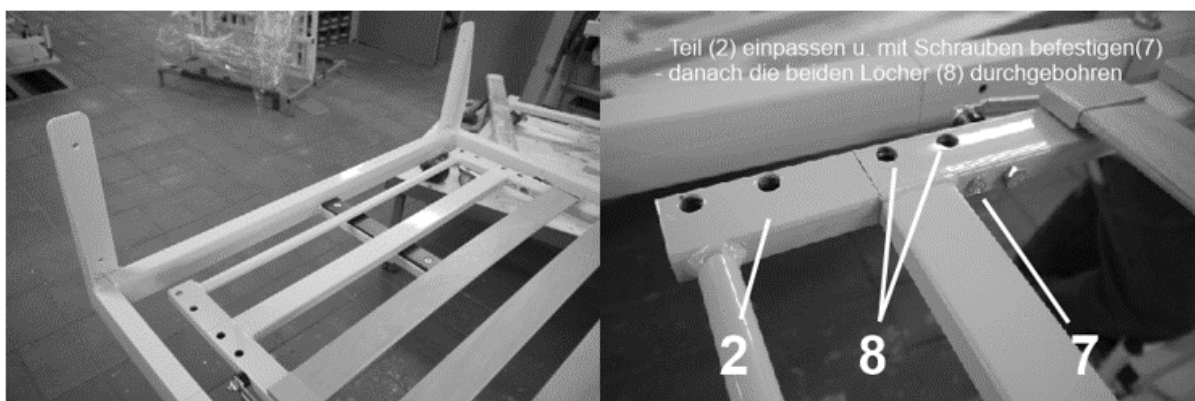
Assembly of the foot traverse and foot section extension (210 cm lying surface length)
